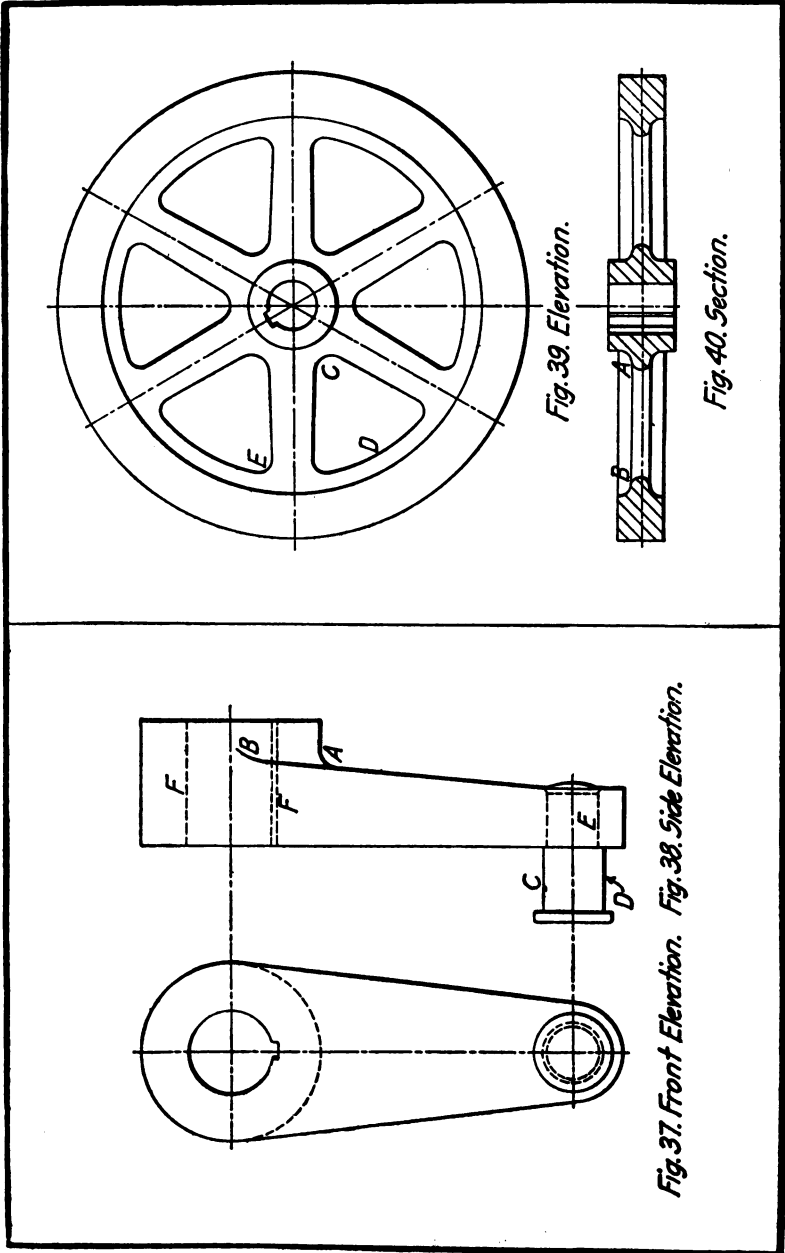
Front Elevation. Fig. 38. Side Elevation.
